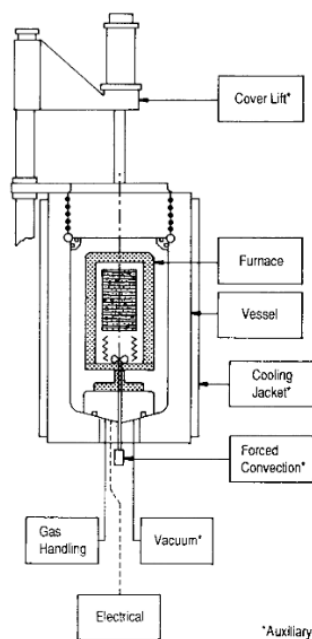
A representative drawing of the layout of a HIP system [50]
